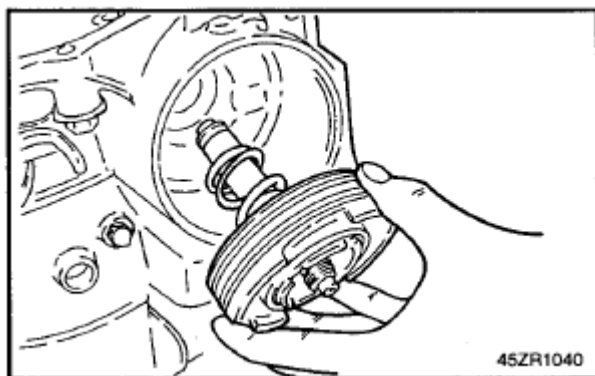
Identifying Kickdown Piston, Servo Spring, & Sleeve
